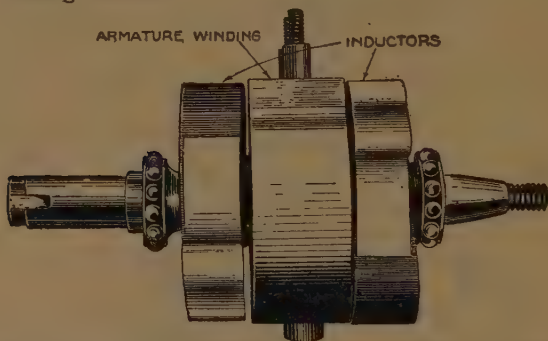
,954.—Remy ball bearing shaft showing inductors and stationary armature of inductor magneto. This type of magneto consists of a winding which is held stationary between the pole pieces, on either side of which revolves a *laminated steel inductor*. Inasmuch as the winding is held rigidly stationary, such construction eliminates all revolving or moving wires, all sliding or wiping contacts, collector rings, etc. This design permits of rugged electrical, as well as mechanical, construction. *In operation*, at each half turn of the inductor shaft, the direction of flow of the lines of force through the winding is reversed, producing in the winding two electrical impulses for each complete revolution. The stationary winding is directly connected through the magneto circuit breaker with the primary of the secondary coil used with the magneto. The timing of the spark is accomplished by shifting the circuit breaker around the inductor shaft, to which is attached the circuit breaker cam. The timing range is 35 degrees.
